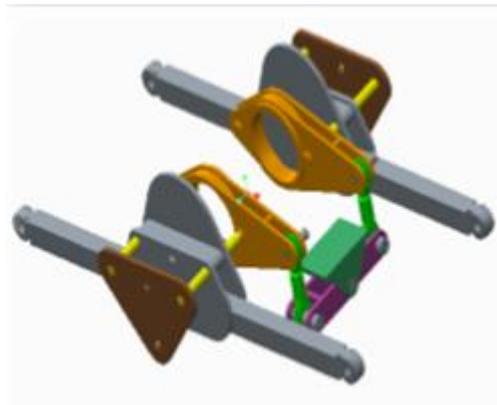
Model of an All-Terrain Vehicle Chassis with Balance Rocker Suspension
